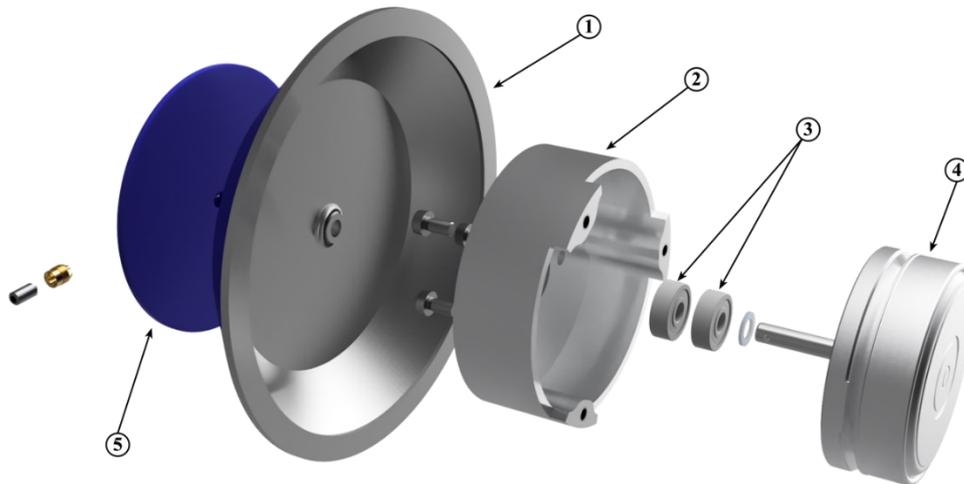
Exploded View of the Reaction Wheel Assembly: 1 – Rotor, 2 – Mounting Bracket, 3 – Bearings, 4 – Motor, 5 – Adapter Disk
